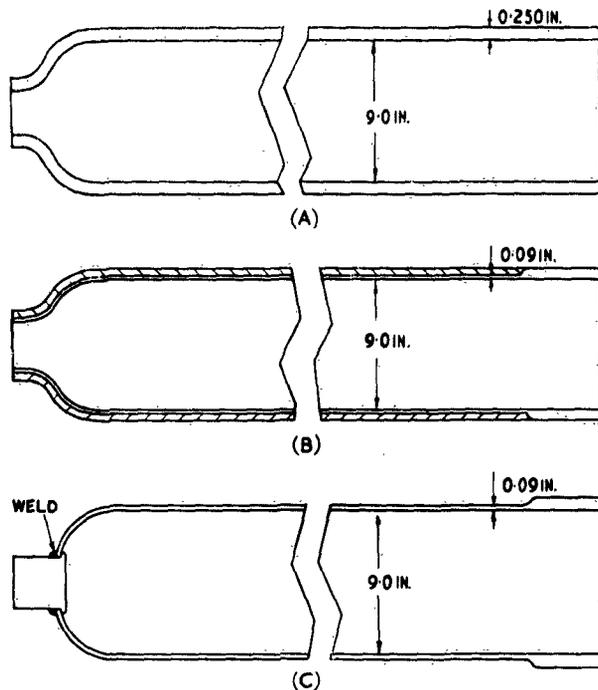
Stages in manufacture of cold-drawn Mayfly tube
